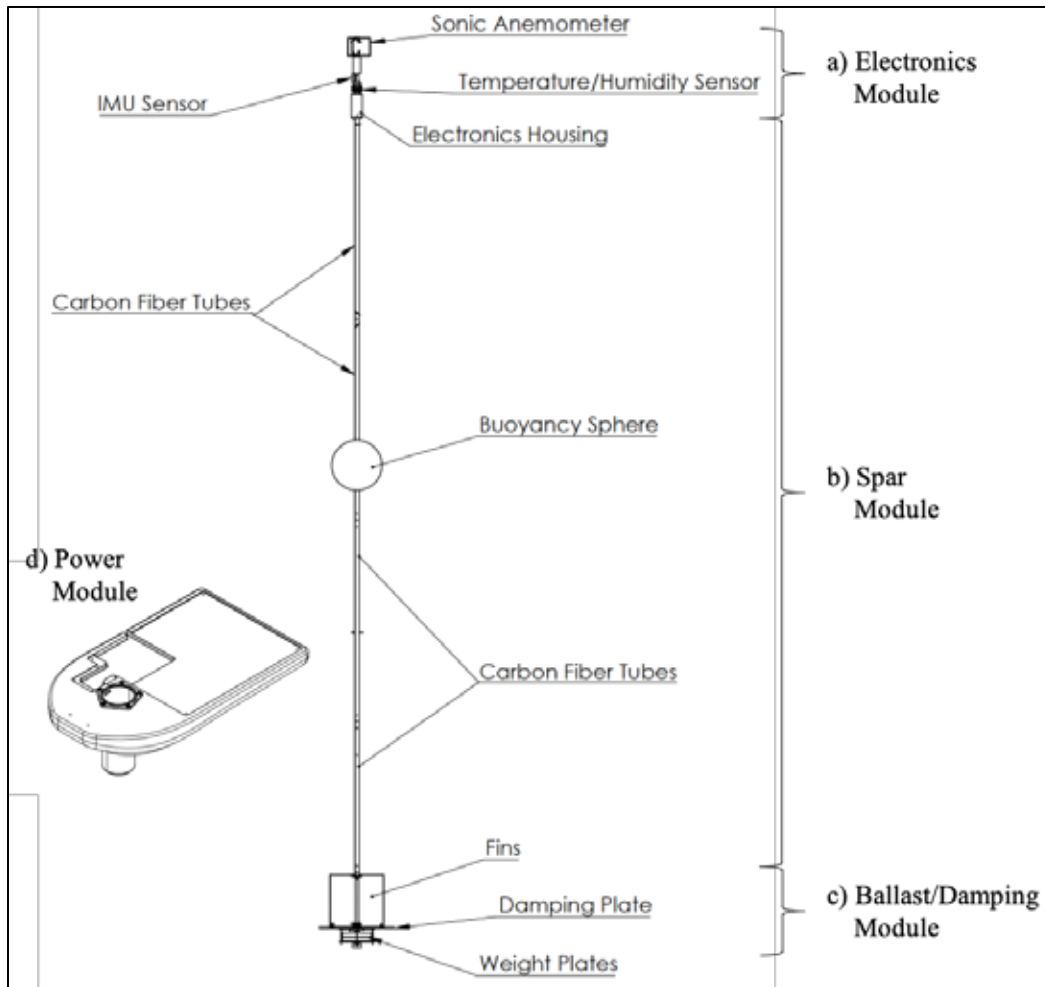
Drawing of version 2 of the I-SPAR buoy. The electronics assembly (a) is the uppermost section and contains all electronics components. The spar module (b) is the center section and contains the carbon fiber tubes and the buoyancy sphere. The ballast/damping module is at the bottom and contains the weight plates, damping plate, and fins. The power module (d) is adjacent to the I-SPAR and connected with a smart mooring line.
